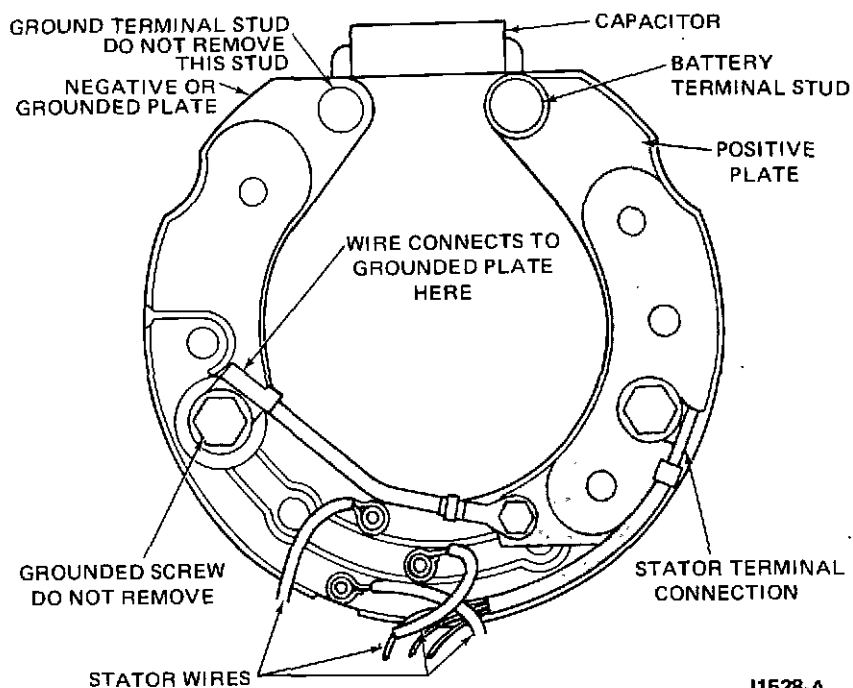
Stator and Rectifier Assembly 61-Ampere Alternator
